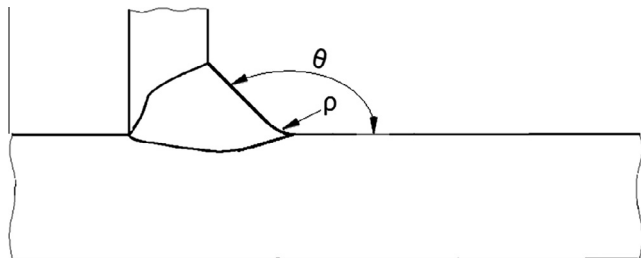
Characteristic geometrical properties of a fillet welded joint, where  $\rho$  is the toe radius and  $\theta$  is the weld toe blend angle.
